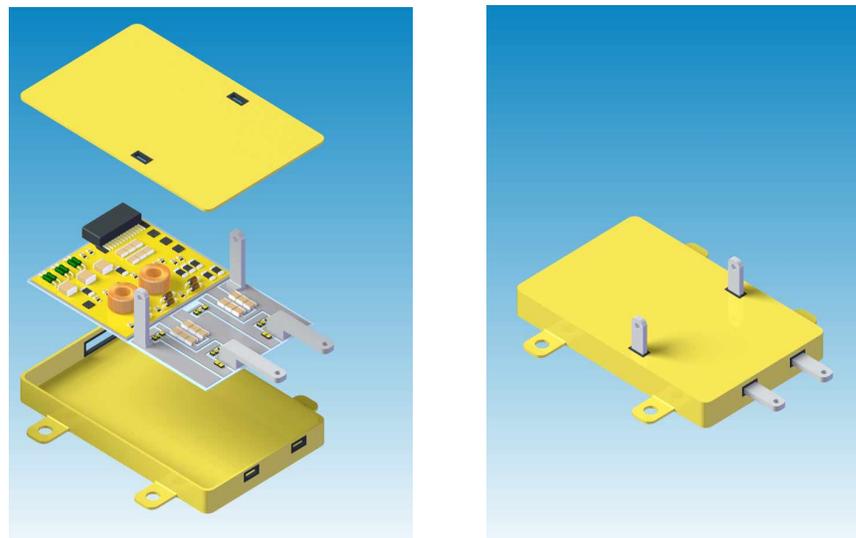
Isometric view of a high-temperature single-phase DC/AC MCPM power module (left) and fully assembled module (right).
